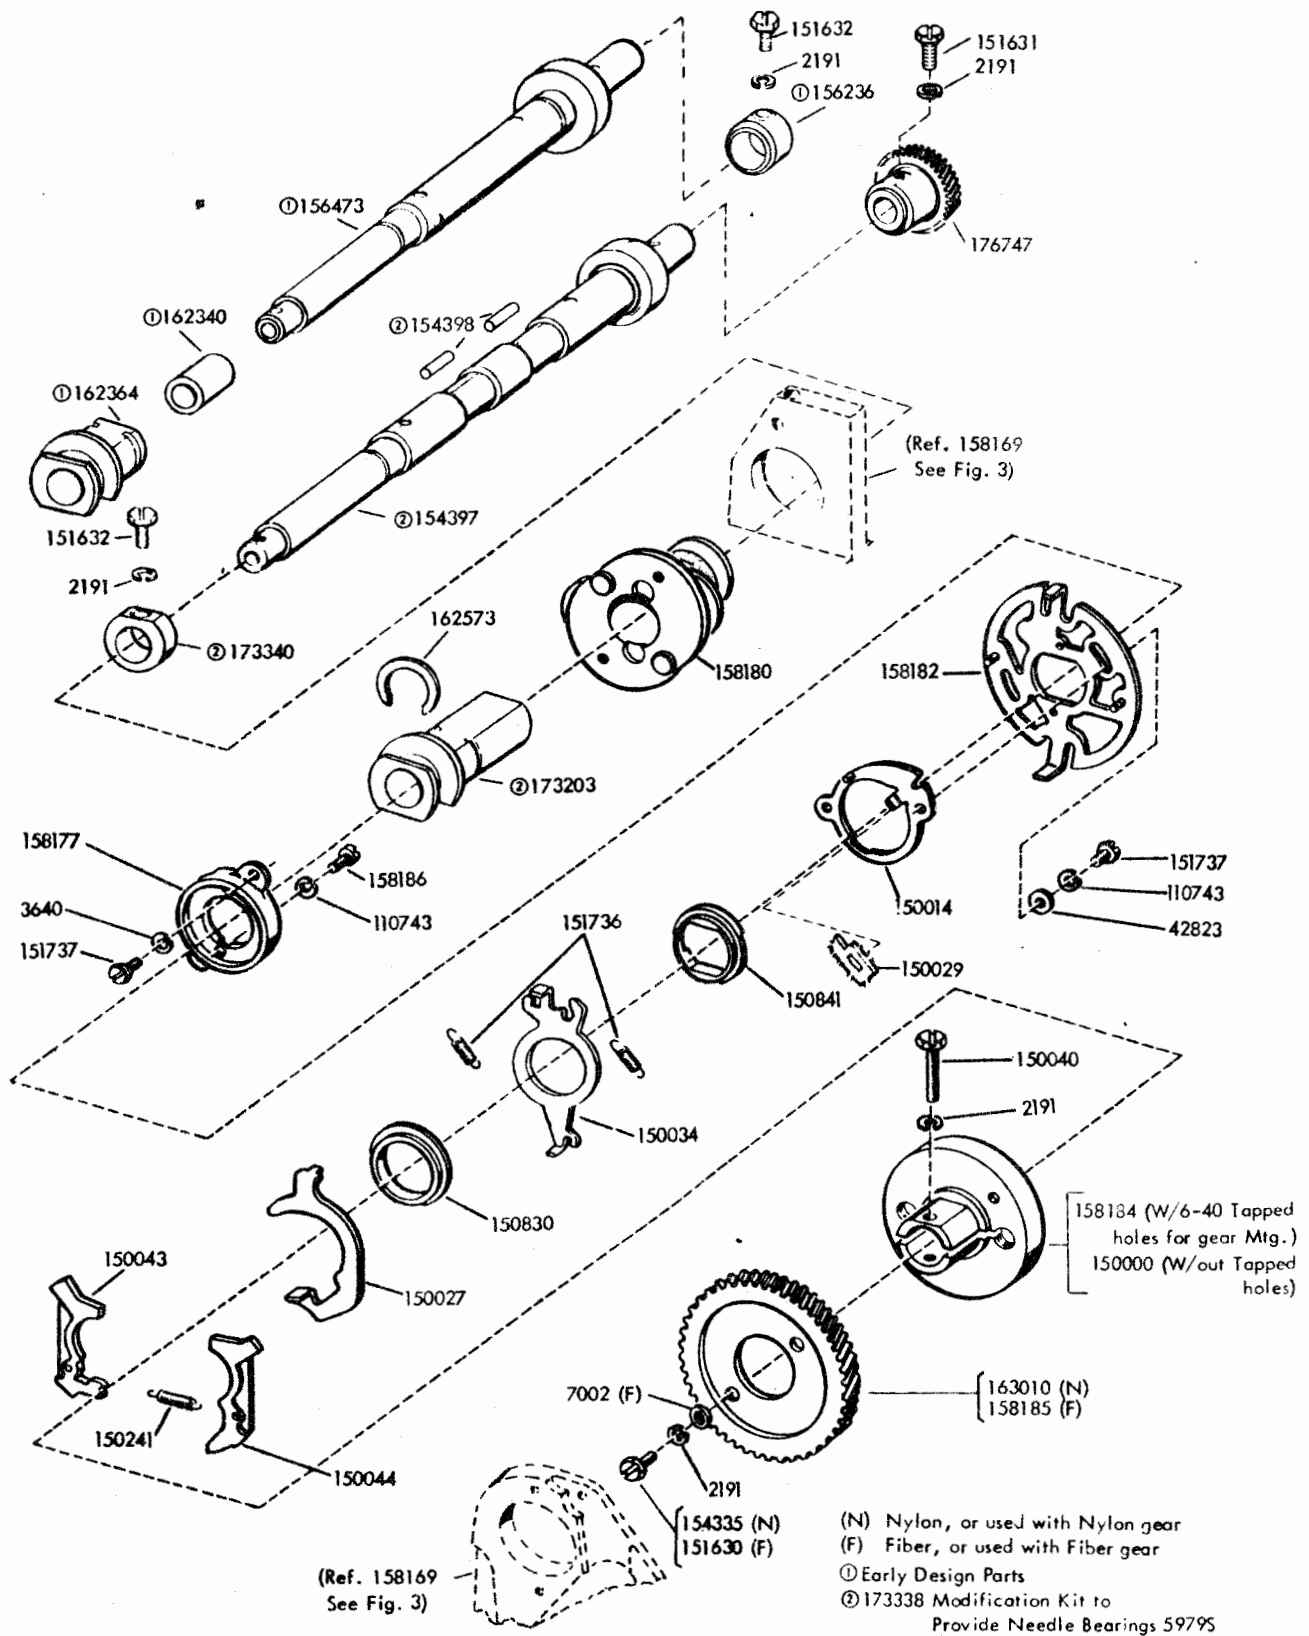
MAIN SHAFT MECHANISM (NON-TYPING PERFORATOR)
